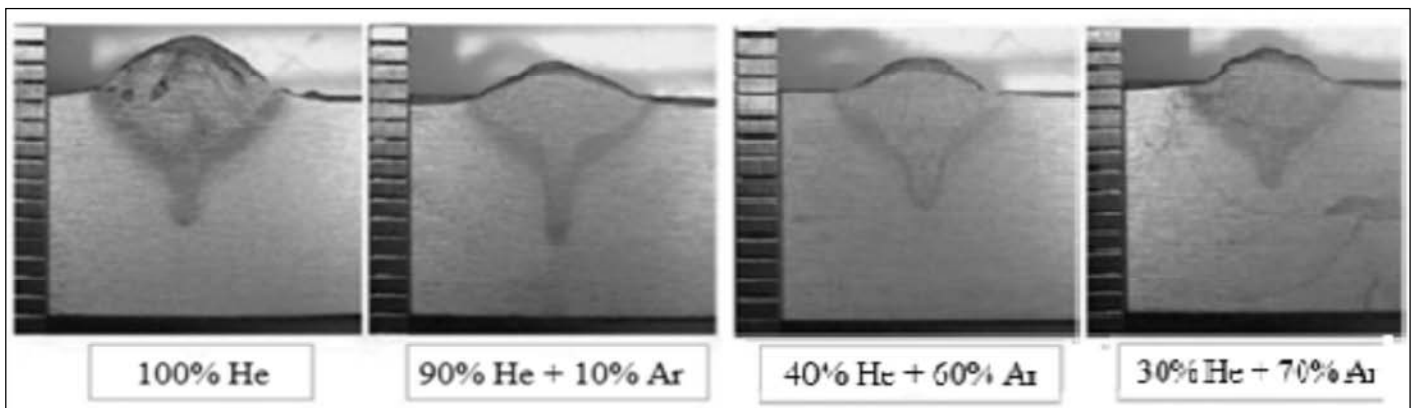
Cross-section of hybrid weld performed with different ratios of inert shielding gas [9]
